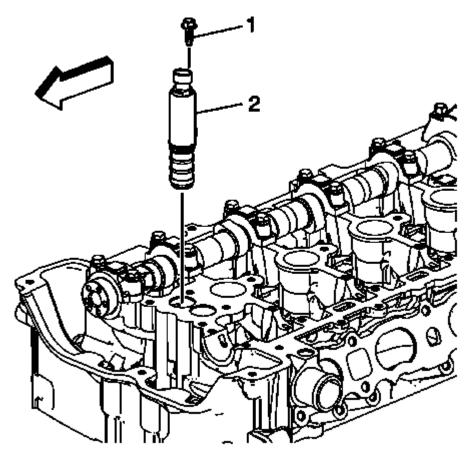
Exhaust Camshaft Position Actuator Solenoid Valve Courtesy of GENERAL MOTORS COMPANY
